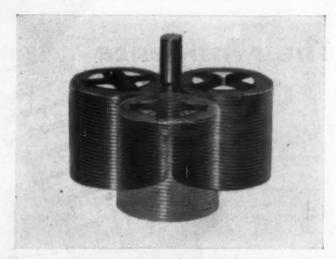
Die arrangement used in cylindrical-die rolling. Two rolls with a center rest are also used
